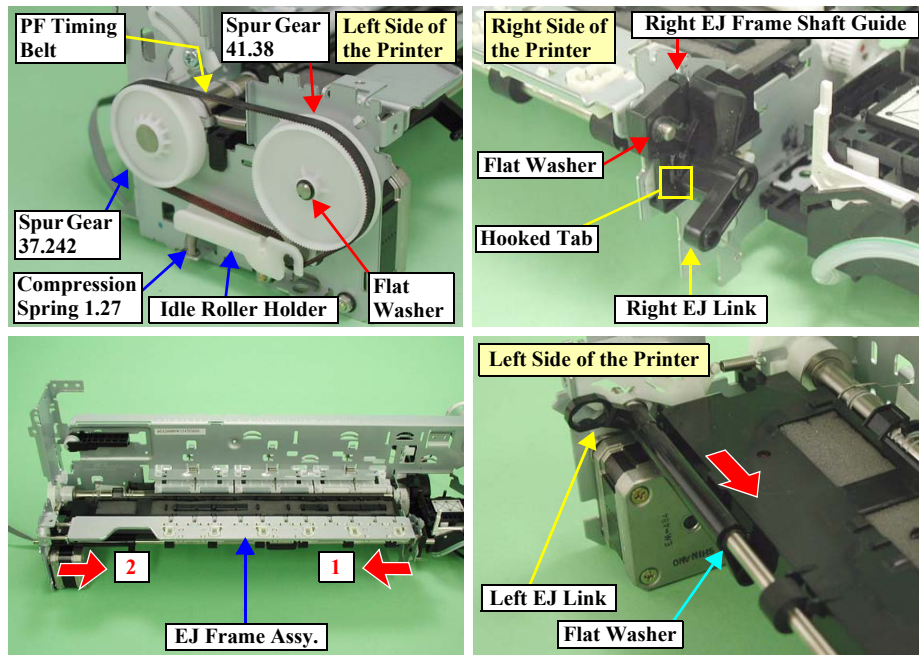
Removing the Front Paper Guide and EJ Roller Assy. (1)
